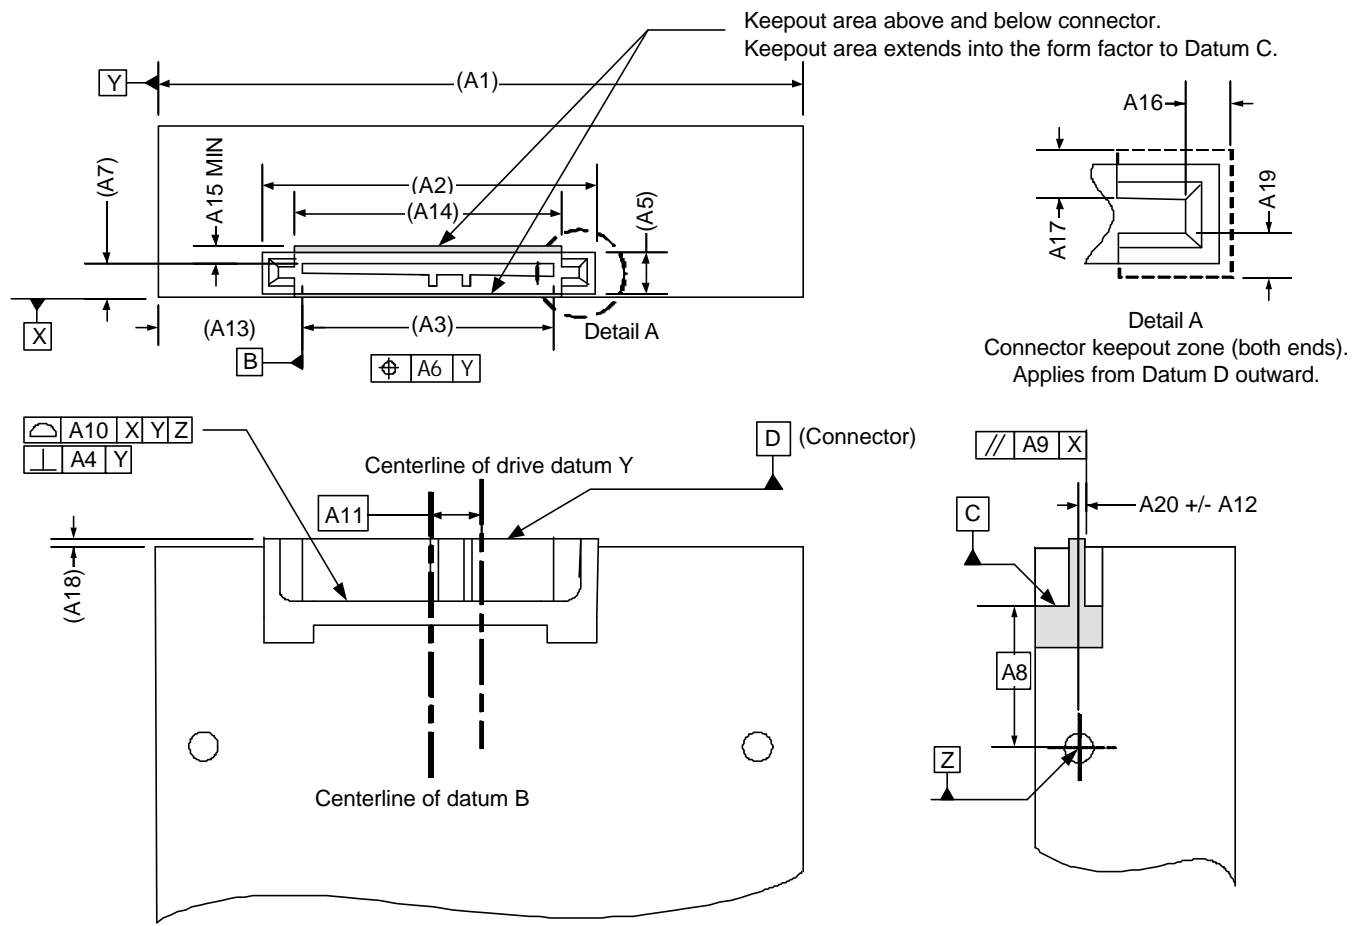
(OPTION 2) Serial Connector Referenced To Bottom Mounting Screw On 63.5 mm (2.5") Disk Drive
